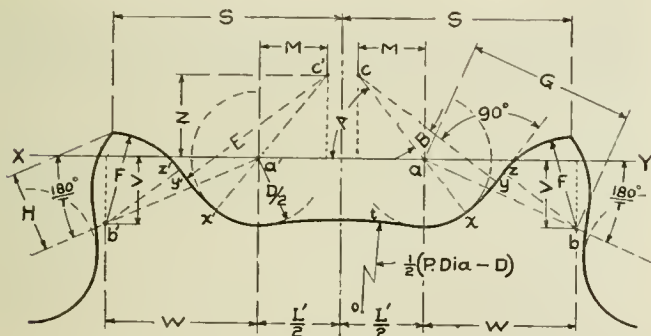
TOOTH FORM FOR BLOCK CHAINS
